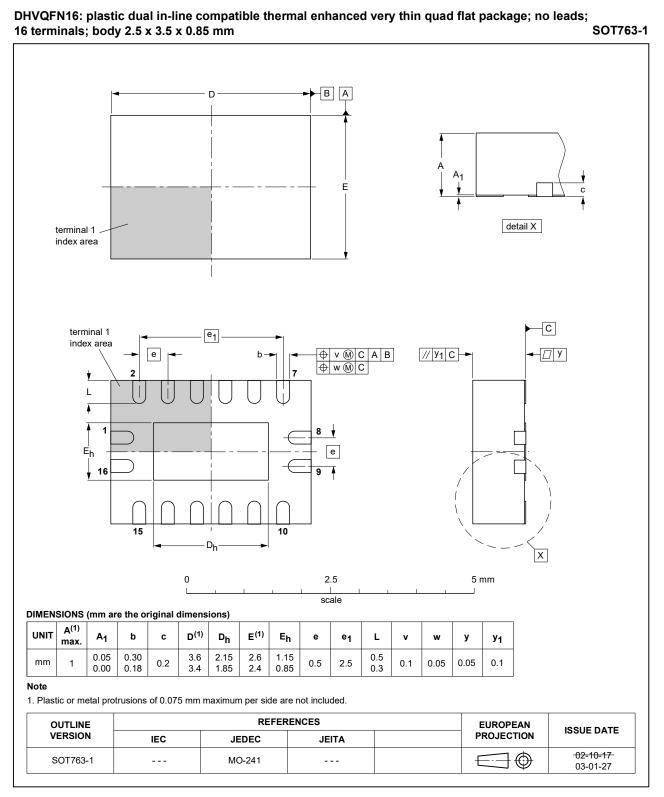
Package outline SOT763-1 (DHVQFN16)
